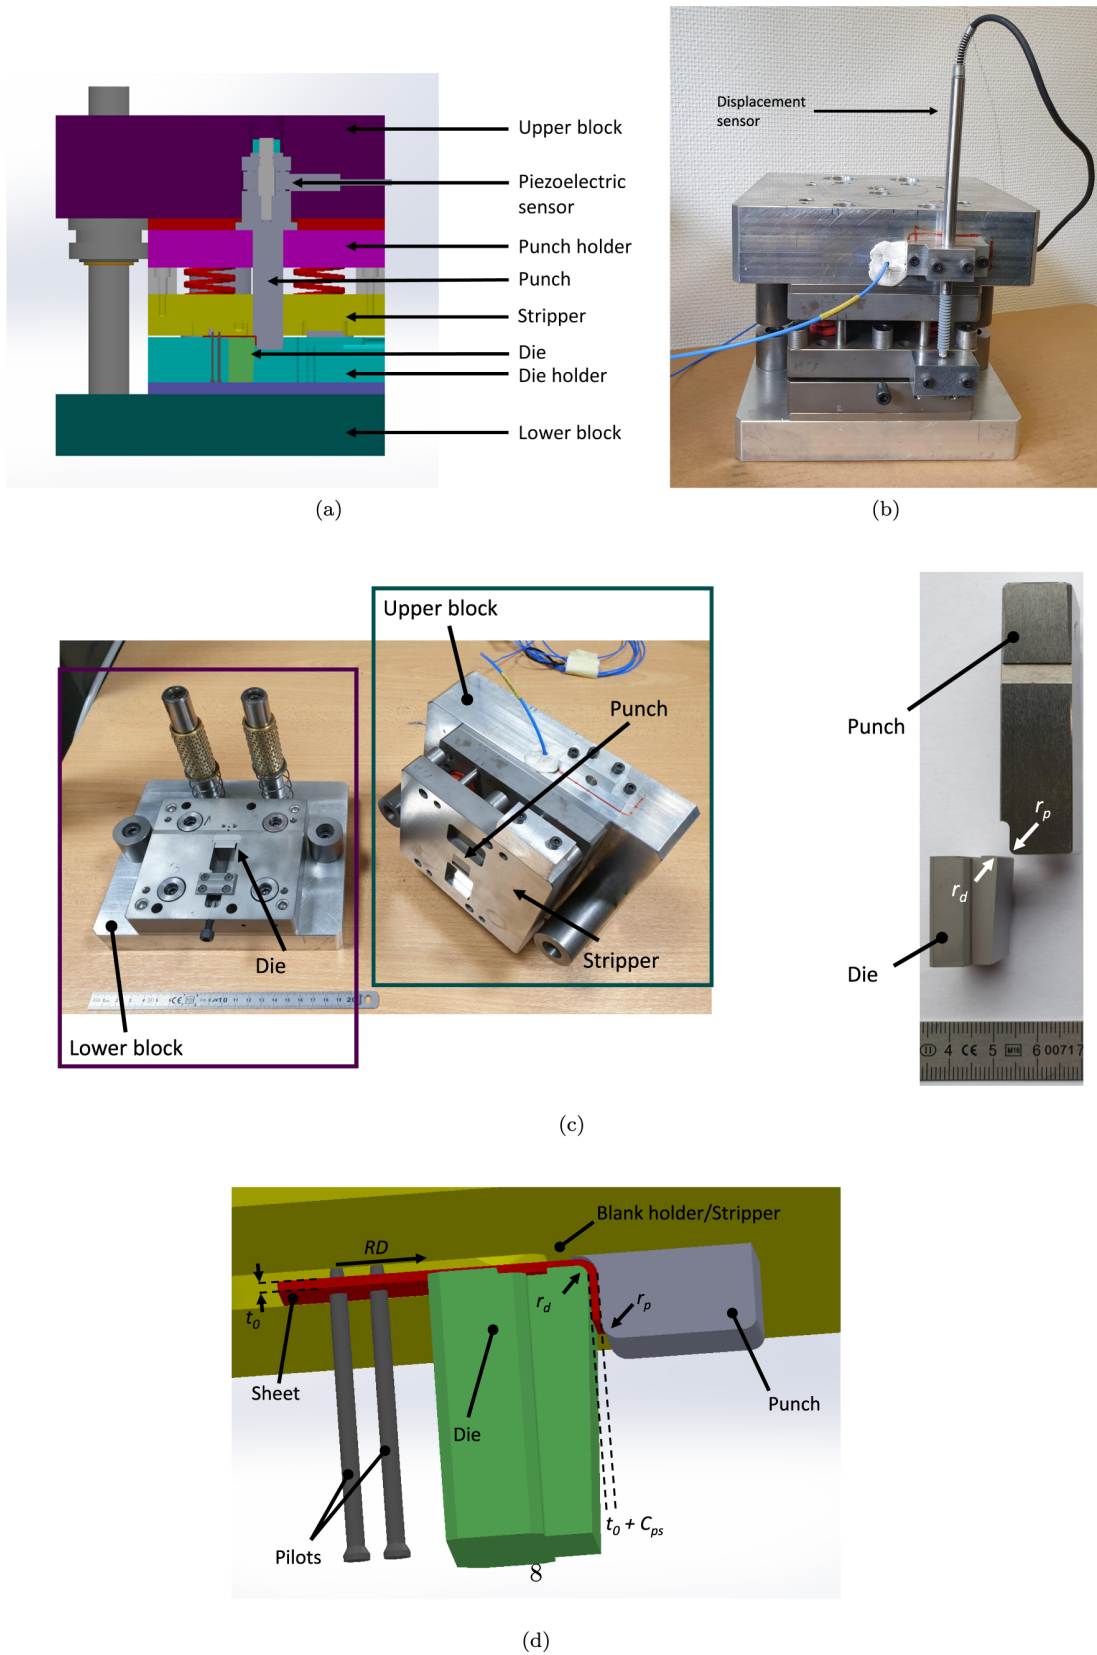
(a) Cross-sectional view of the single stage bending tool; (b) Tool; (c) Upper and lower blocks of the bending prototype as well as the useful parts, such as the stripper, the punch and the die, used for the bending of sheets with a nominal thickness of 0.8mm; (d) Schematic of the tools used for bending and their dimensions. For a sheet thickness of 0.8mm, $r_d = 0.8$ mm, $r_p = 1.5$ mm, $C_{ps} = 3$ μ m.
